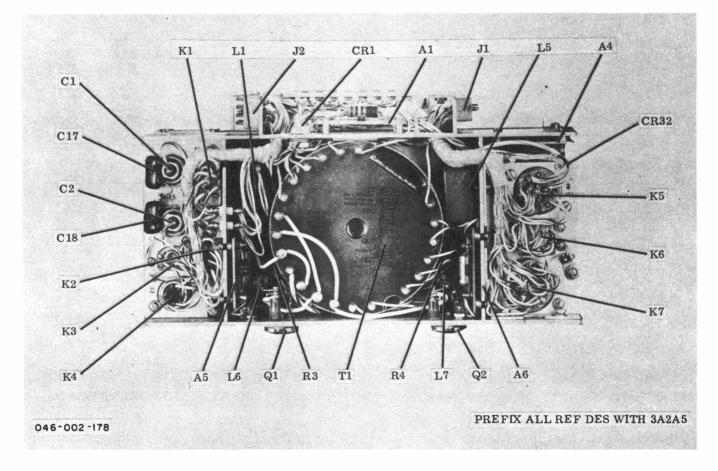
DC-to-DC Converter Assembly 3A2A5 Right View, Component Location
